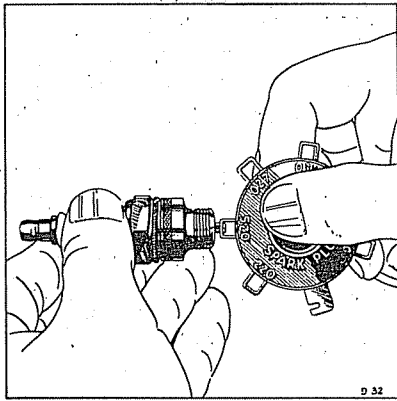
Measuring Spark Plug Adjustment with Gauge.
